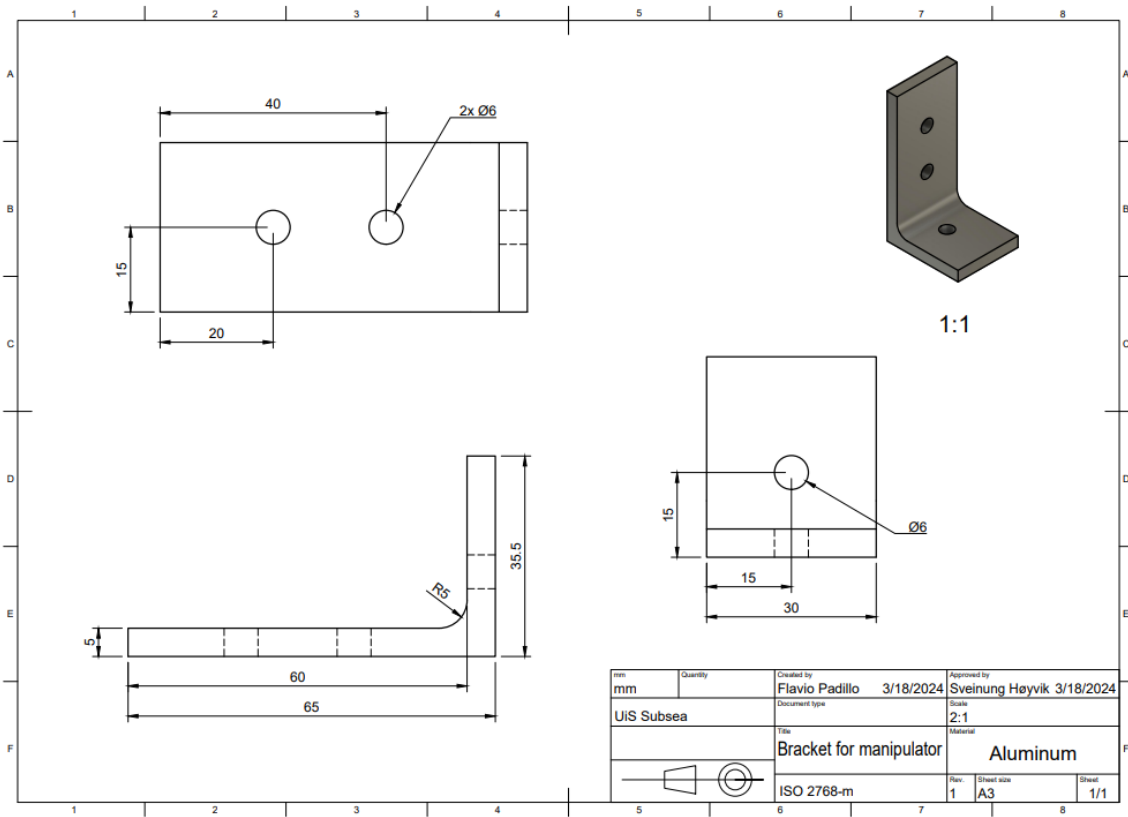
Technical drawing of the bracket for manipulator 2:2
